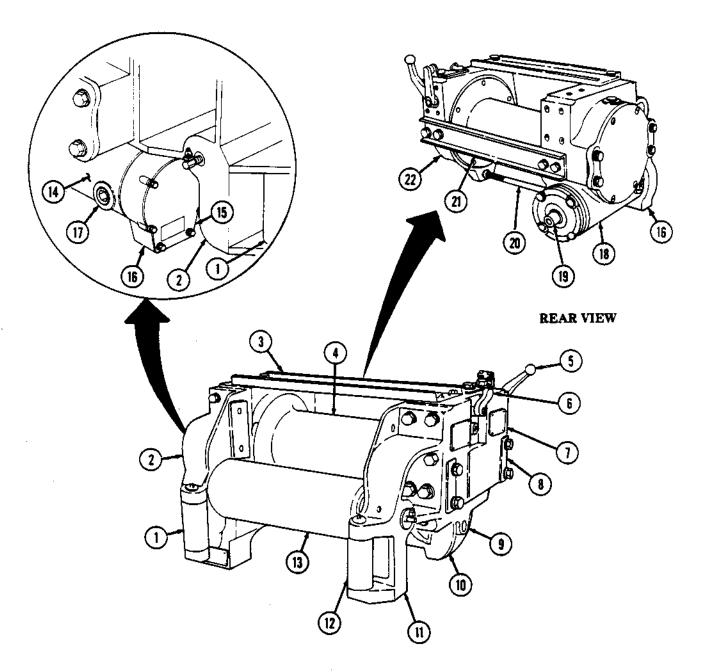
Front Winch Assembly With Level Wind and Cable Tensioner.
